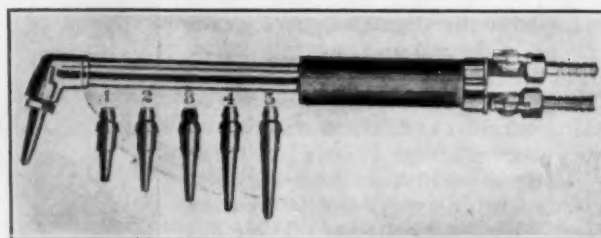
WELDING TORCH WITH EXTRA TIPS.
